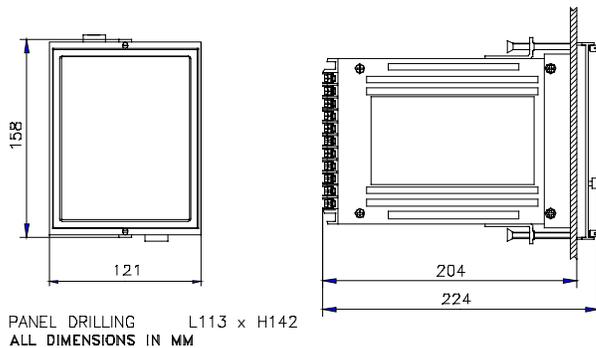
SINGLE MODULE ENCLOSURE MOUNTING
